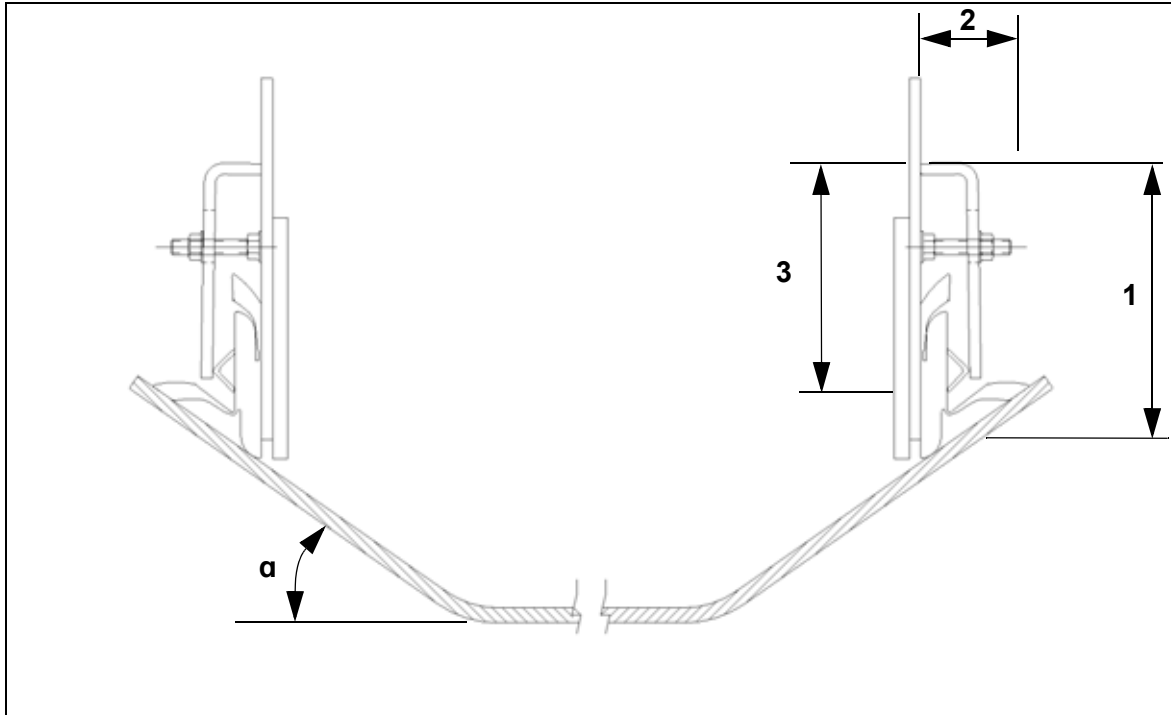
Dimensions - MARTIN® Double APRON SEAL™ Skirting System (example)
